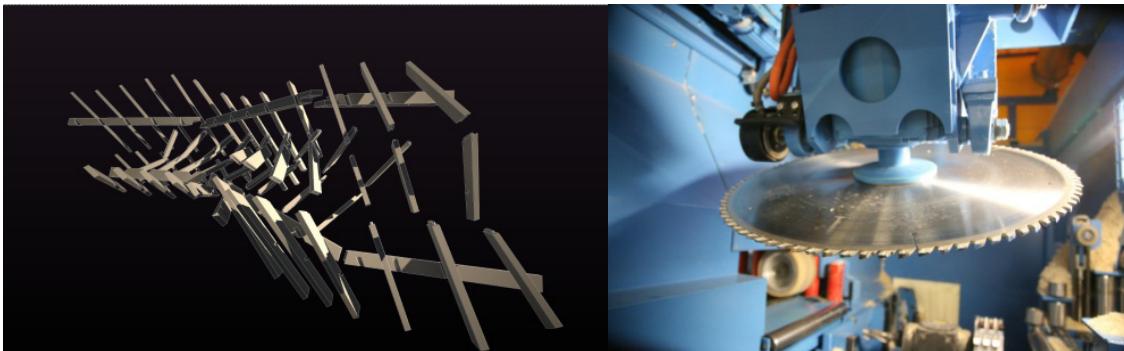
, Fig 11. Modern wood joinery machinery still inherits the basic tooling processes of traditional wood craft: cutting drilling and milling. This allows the production of a geometrical versatile monolithic wood joints as shown in the explosion diagram of the projects demonstrator on the left
